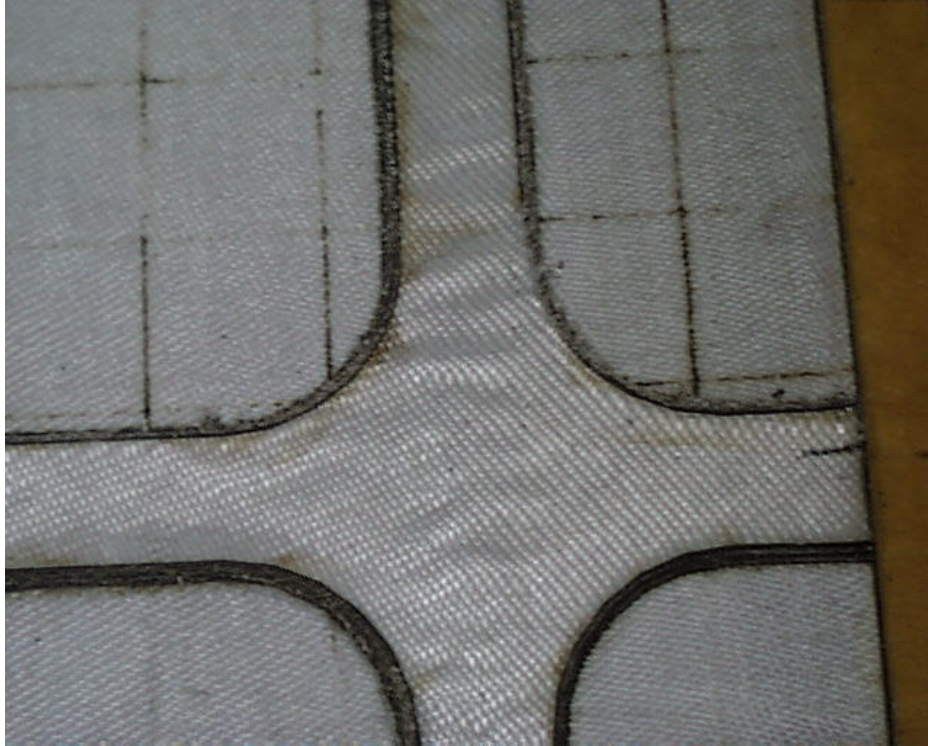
Detail of stiffener section of decubed blastshield Demonstration Component 1 showing ply wrinkling
